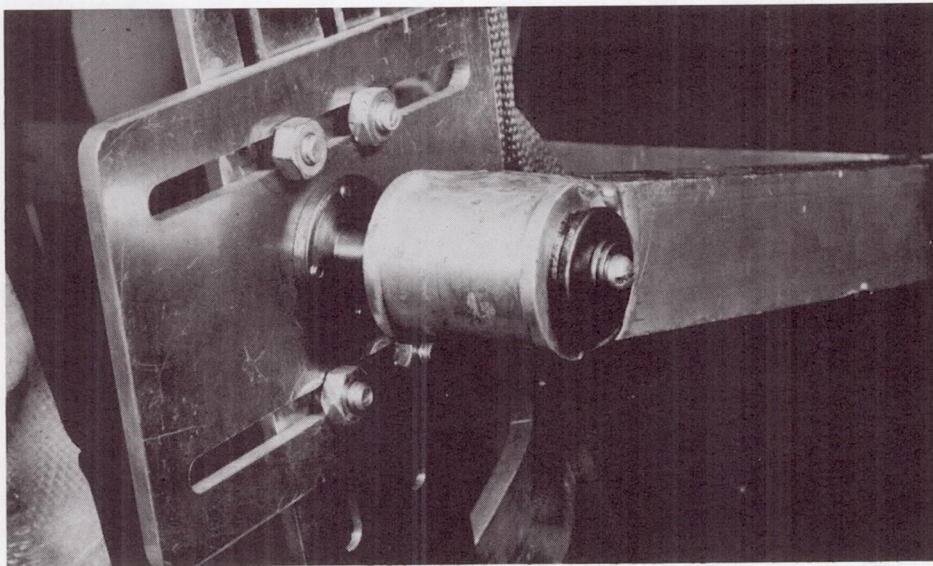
Prototype Harness: Side Bearing Pivot Point
